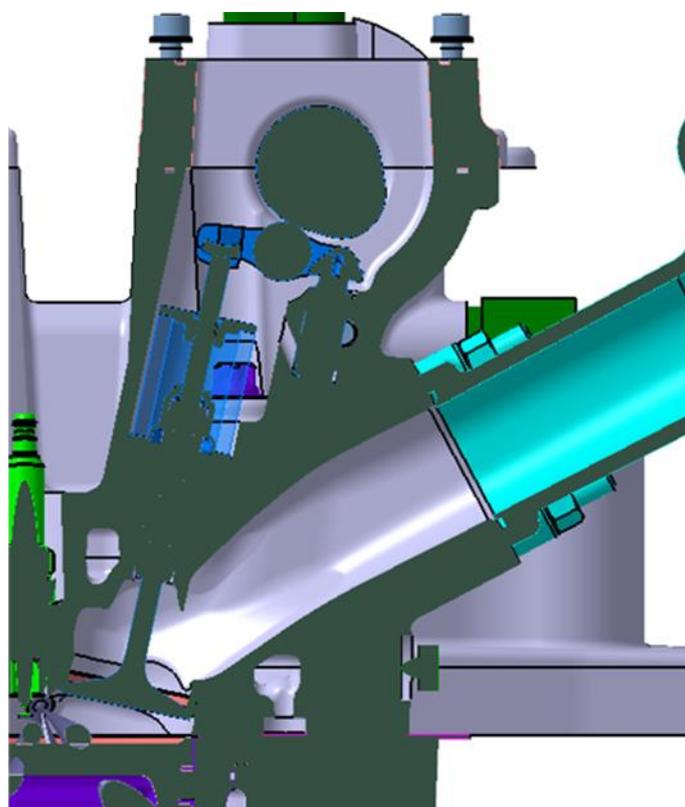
Partial CAD view of combustion chamber and intake port of IFPEN swumble engine
